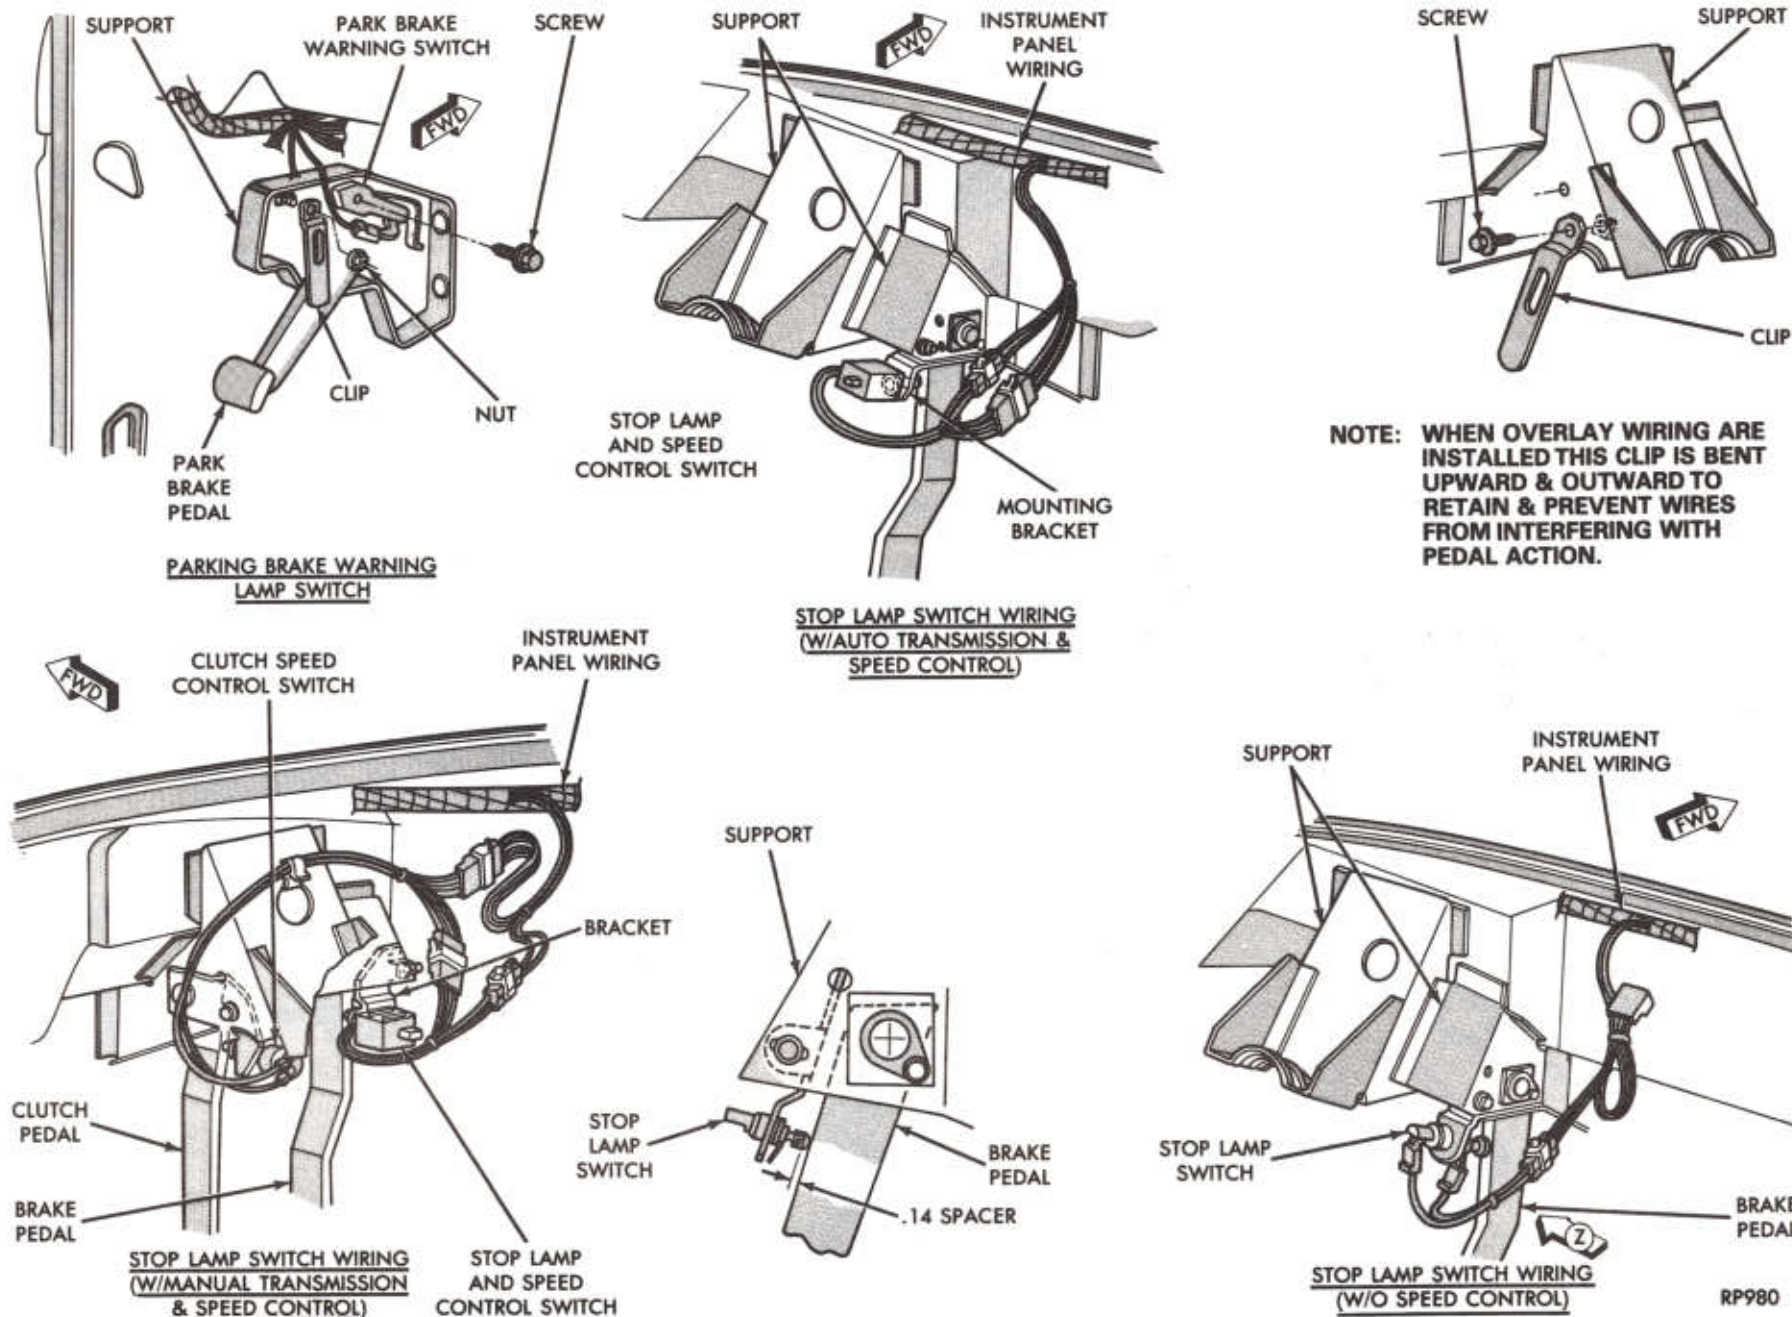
Speed Control, Stop Lamp, and Park Brake Wiring and Component Identification
